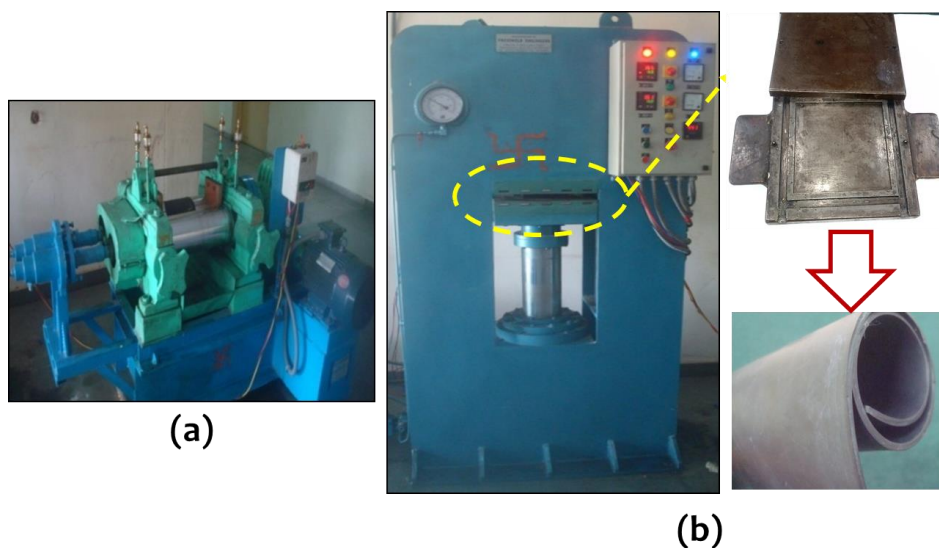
(a) Two roll mixing mill (b) Pressing of rubber sheets using high temperature compression moulding press, mould for pressing and fabricated flexible rubber sheet
